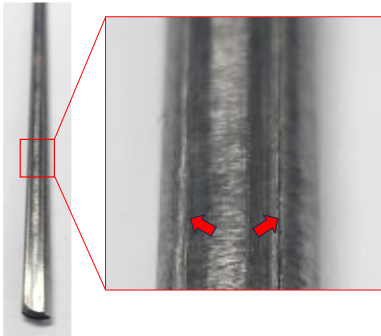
Folding occurred during circular- and half-circular shape drawing process
